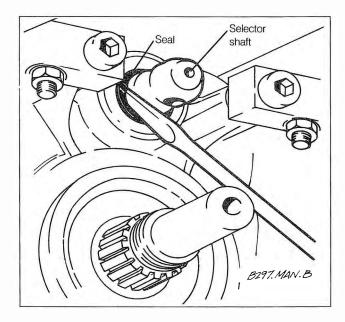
Selector shaft oil seal being pried out with screwdriver. Take care not to scratch selector shaft.
